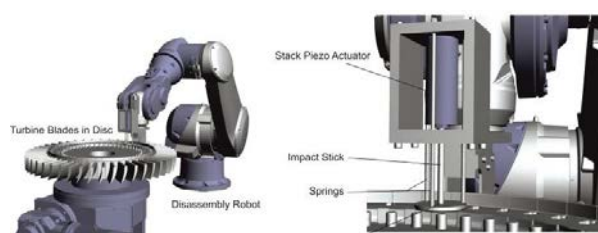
Example for an Automated Turbine Blades Disassembly Workplace (Robot Stäubli TX200)
